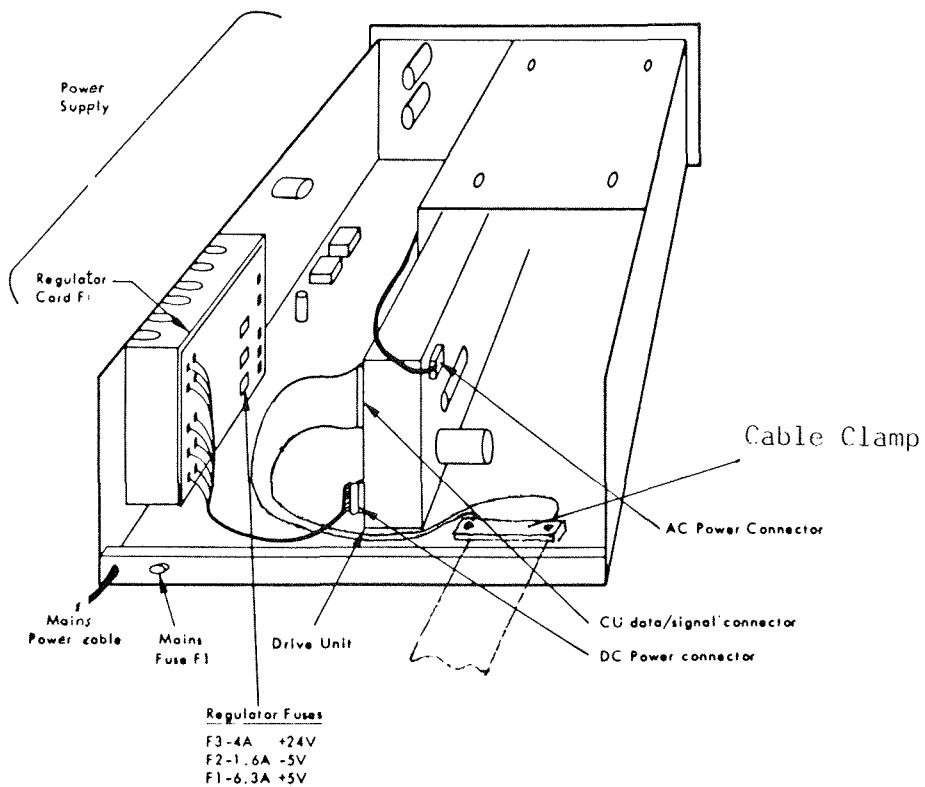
FLOPPY DRIVE CHASSIS, REAR VIEW
